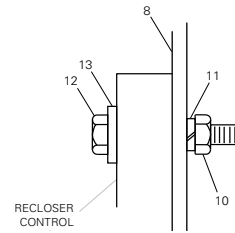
Hardware assembly for mounting the control (Substation Frame Accessory KA89VV10).
